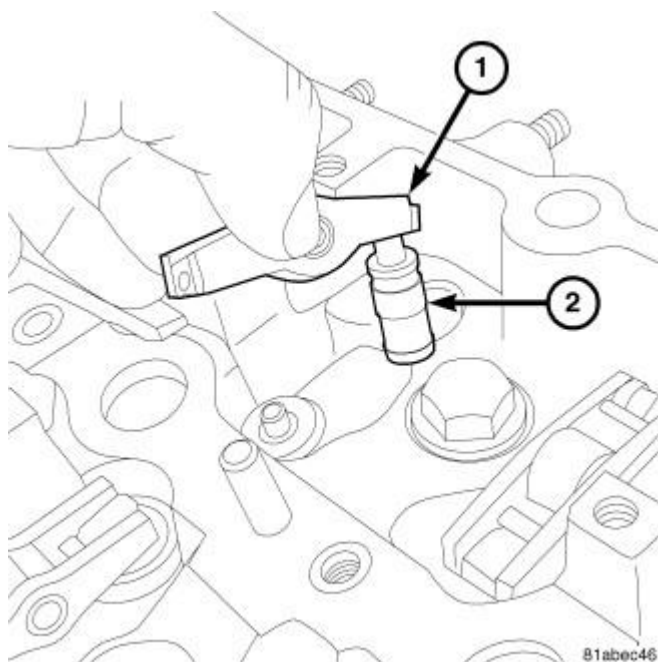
ROCKER ARM AND LIFTER ASSEMBLY
